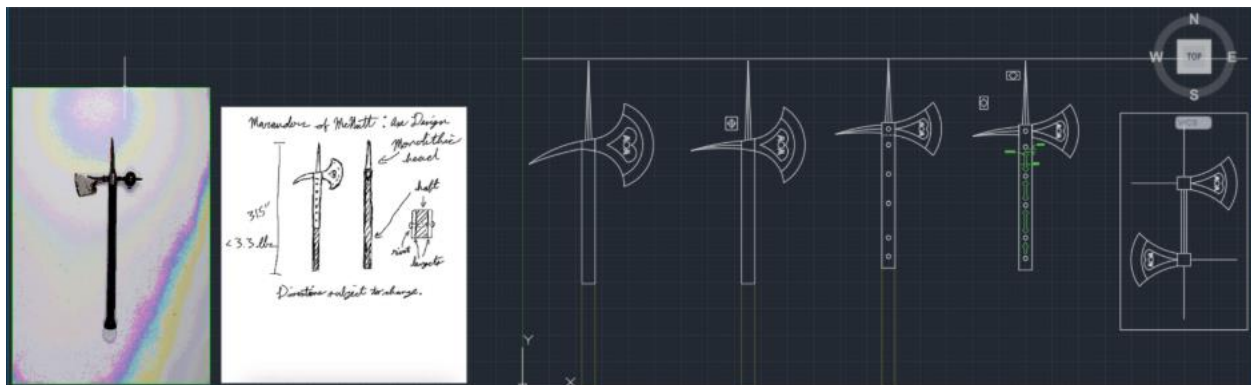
(From left to right) Historical size reference, original design sketch, initial CAD iterations (drafts 1&2), final design sketch (drafts 3&4), and sand mold layout.
